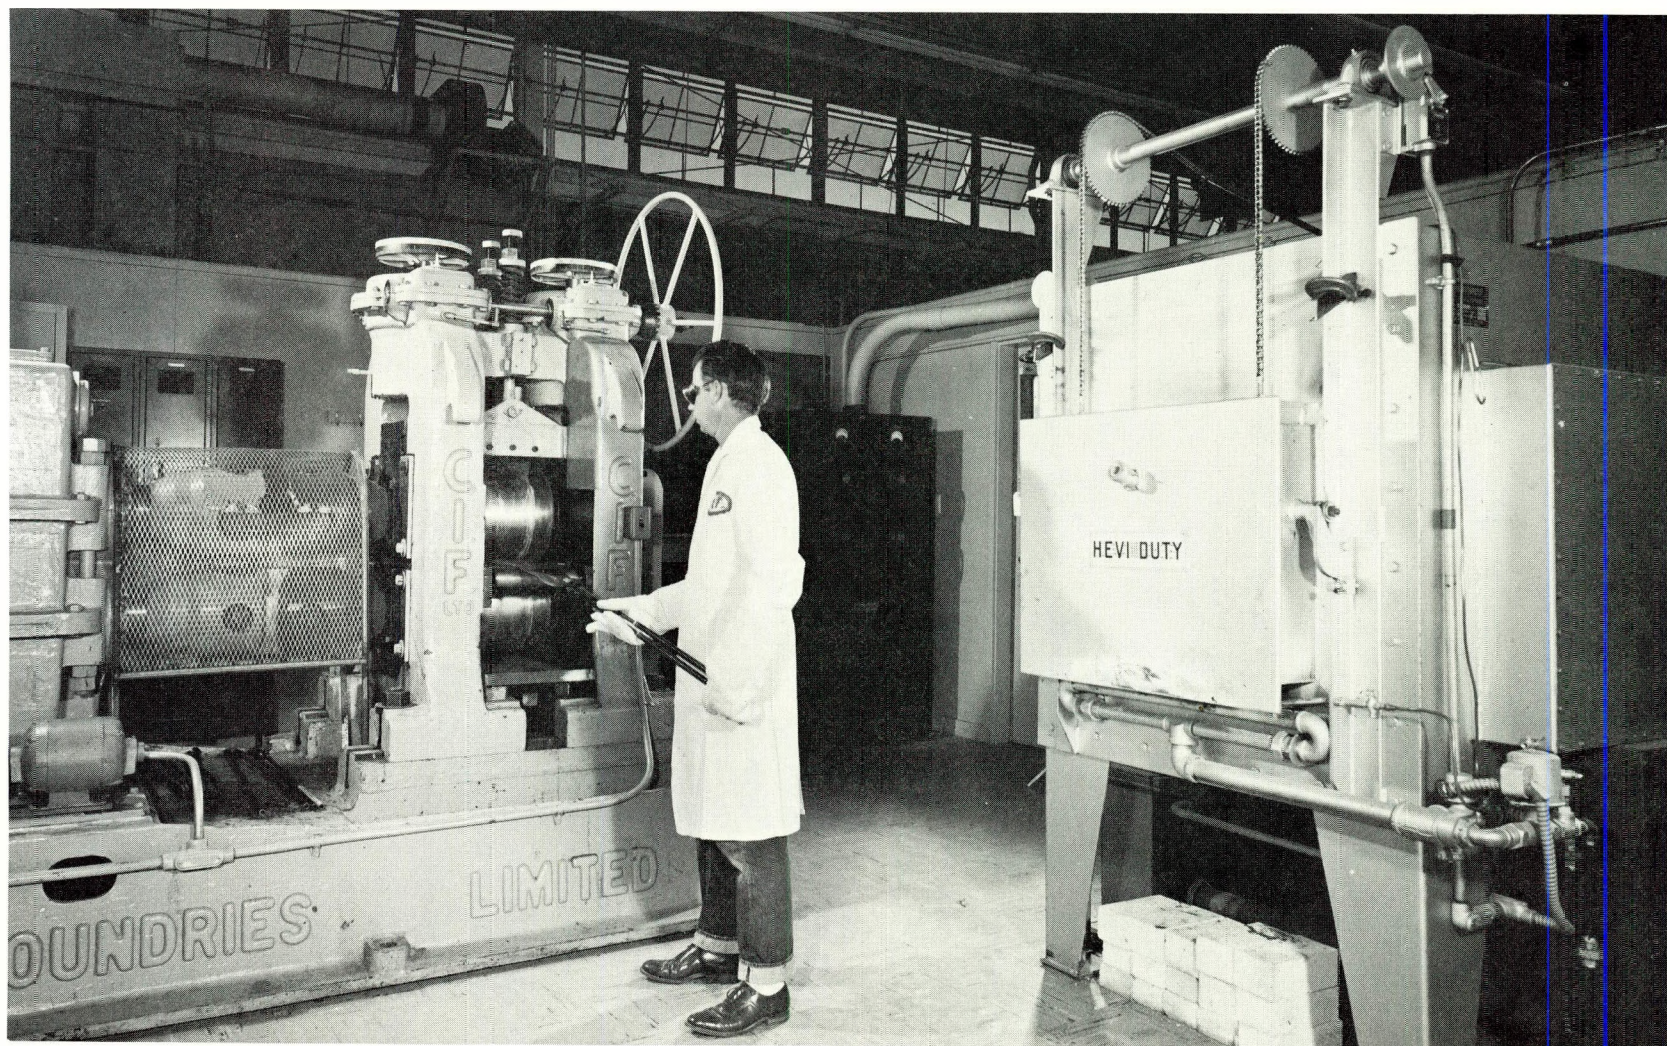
Hot Rolling Plates for the Fuel Element Assembly
